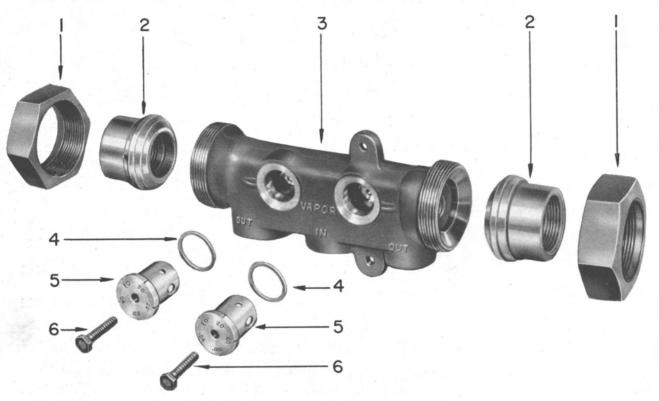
Exploded View of No. P-1152 Manifold Fitting
